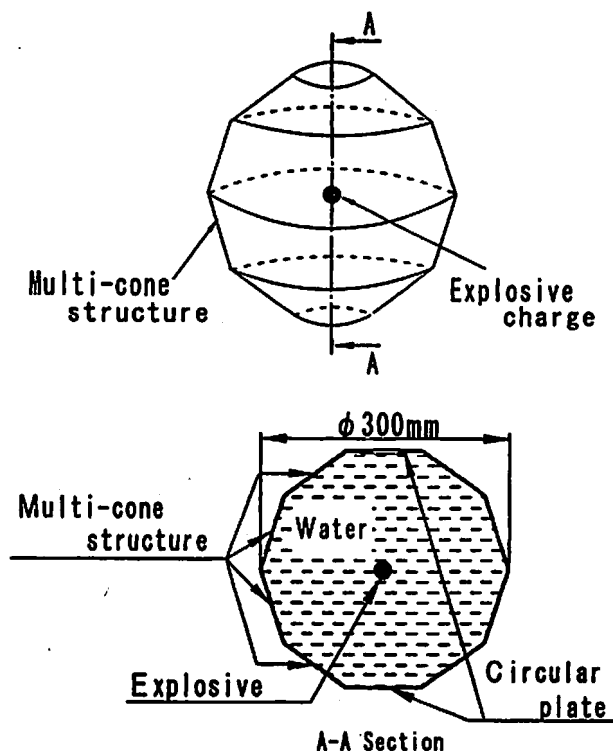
Set-up for non-die explosive technology to make spherical shell
